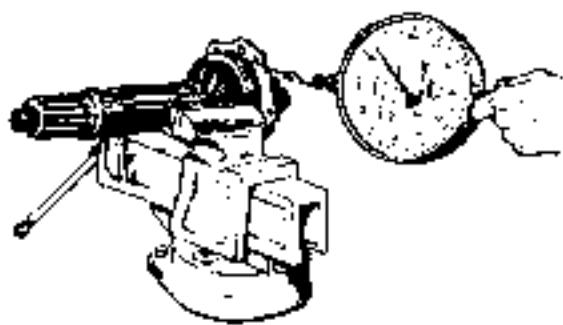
Adjusting Check of Driving Bevel Gear Bearing
